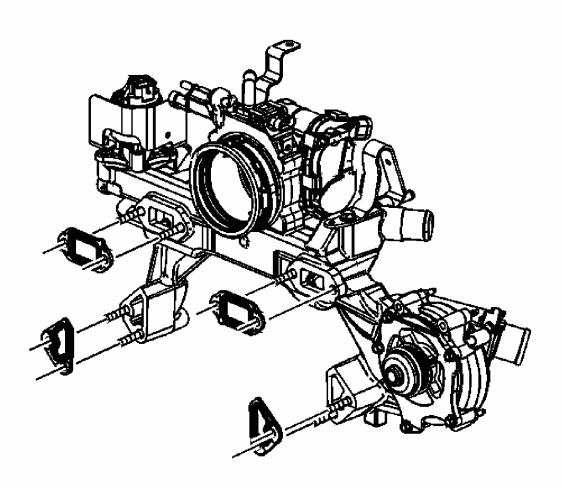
Removing/Installing Water Pump Housing Gaskets & Bolts Courtesy of GENERAL MOTORS CORP.
